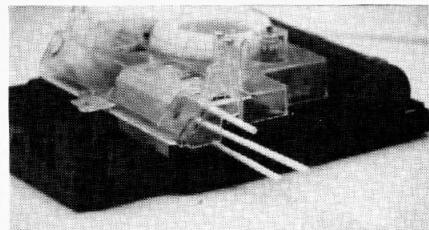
YOU WILL HAVE TO MODIFY the base and gear cover to accommodate the shafts.
